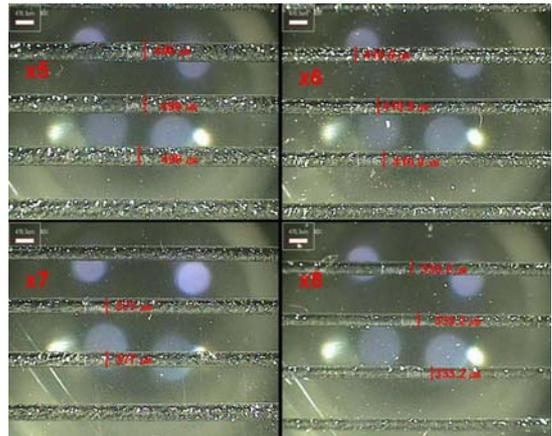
Result of spot size Measurement(SH-71S coating film)
